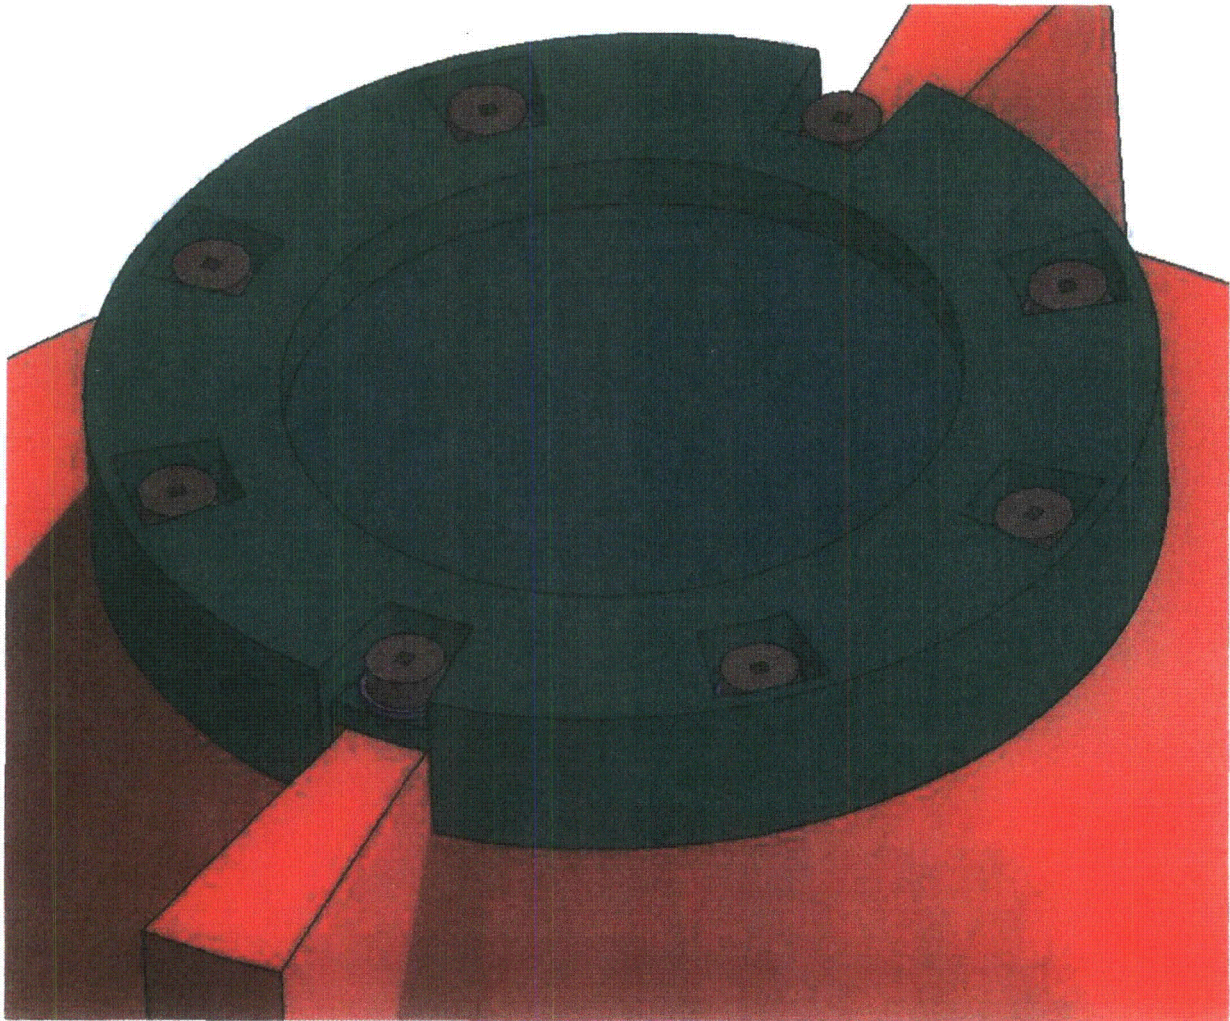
Zoomed View of Shield Liner with Bolt-Protecting Impact Plate
